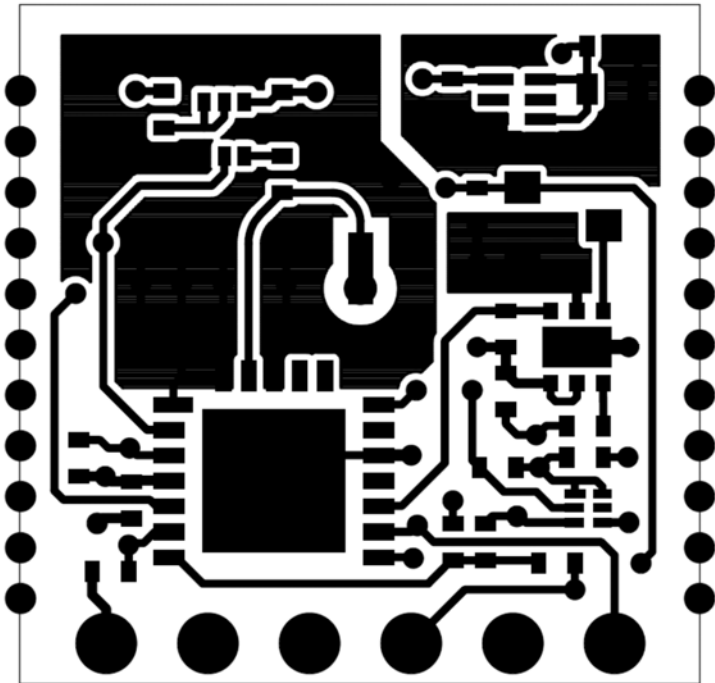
INTERFACE ADAPTER BOARD TOP LEVEL ROUTING
